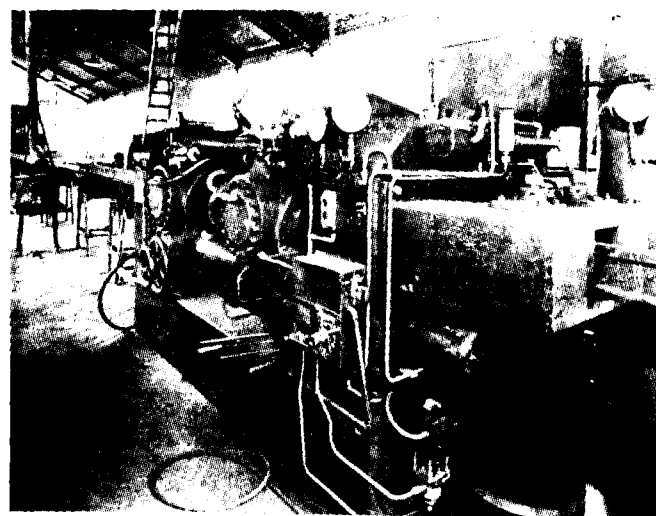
The A. I. Type APF/40 Flash Butt Welder, here shown, will handle Rails up to 13 sq. in. section.
